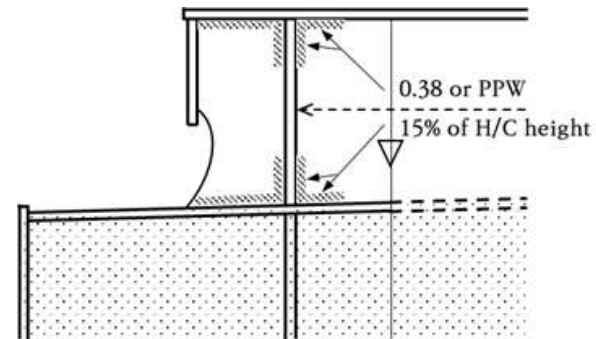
Welding of hatch coaming (Transverse)
